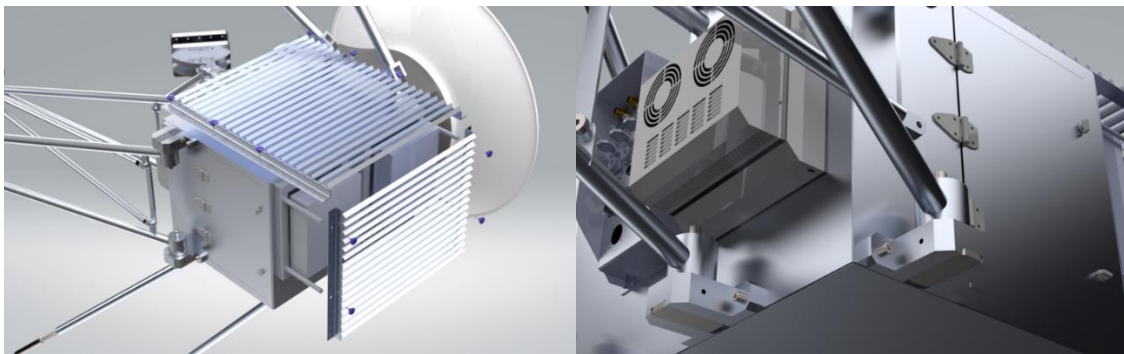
Details on the sun shutters and outdoor thermo-cooler
